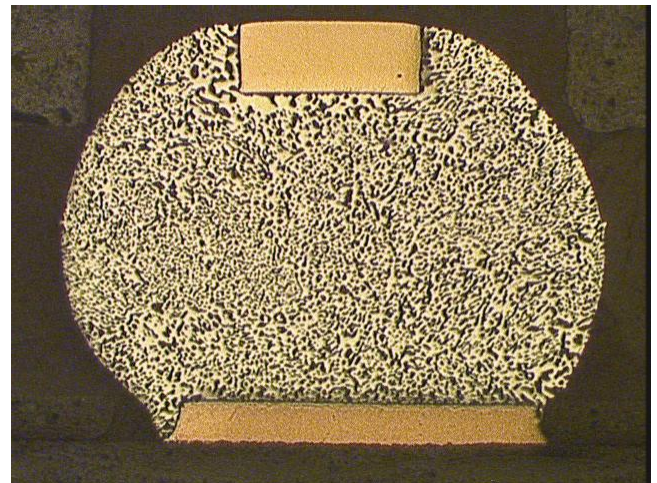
Mezalok Stacking Connector, Typical Solder Joints, SnPb Alloy
